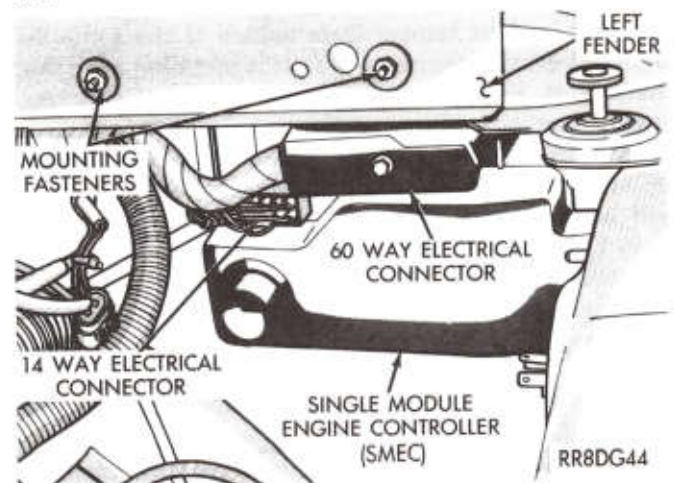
Single Module Engine Controller (SMEC) Mounting Location
